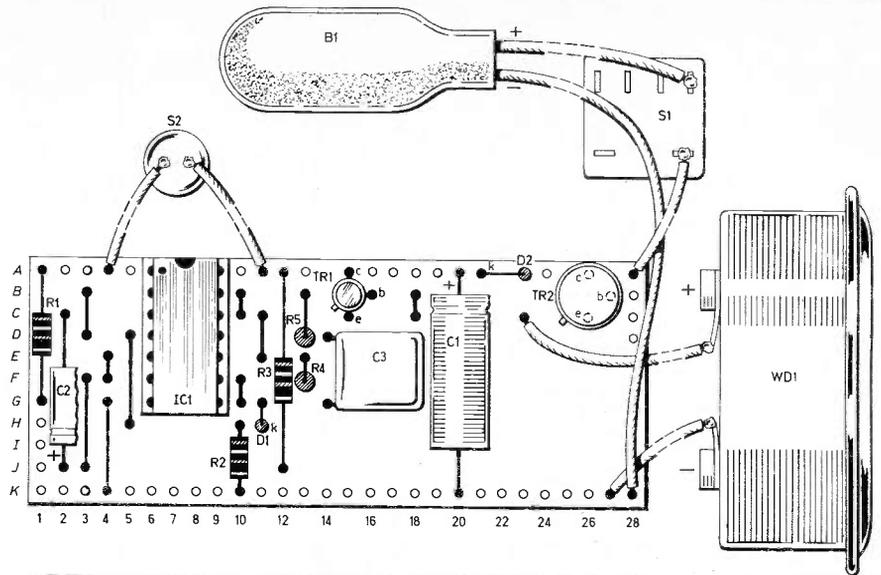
(Right). Component layout, underside, showing component breaks in the copper strips and interwiring details for the Pushbike Alarm.
